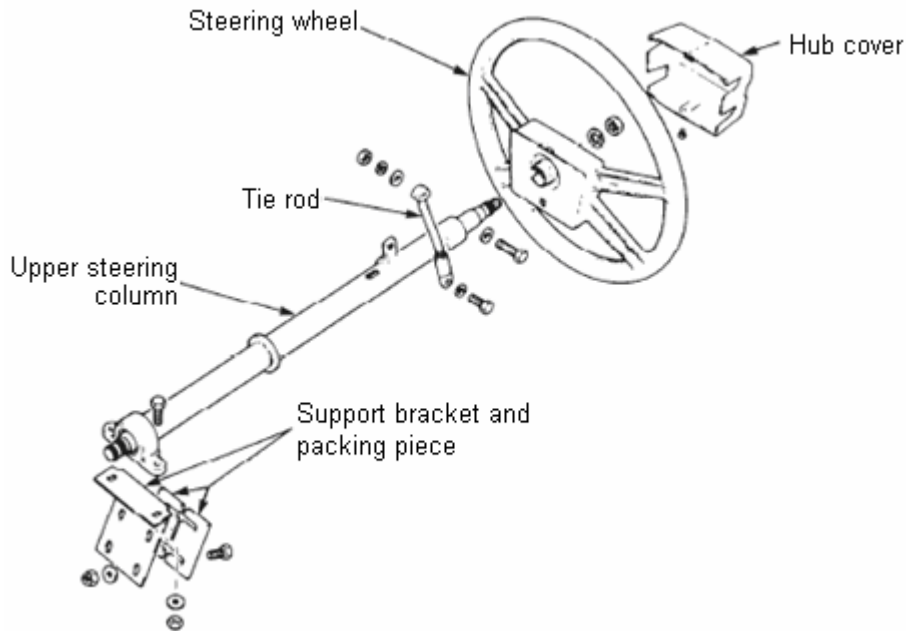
Steering Wheel, Column and Upper Shaft Assembly
